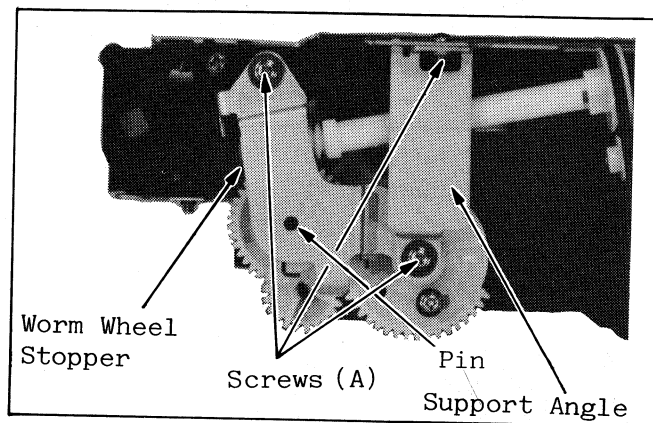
Adjustment of Cassette Up Gears-(5)
